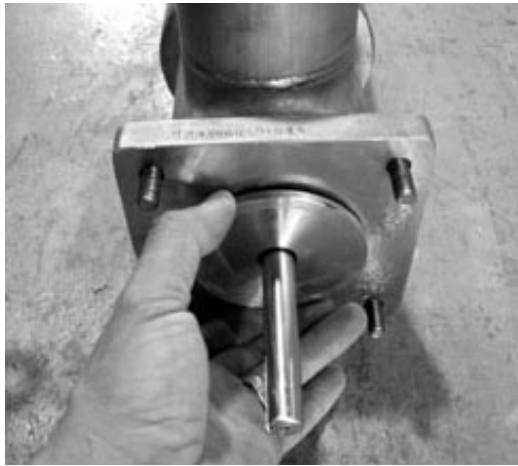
Stationary Seal, Line up Pin with Groove
